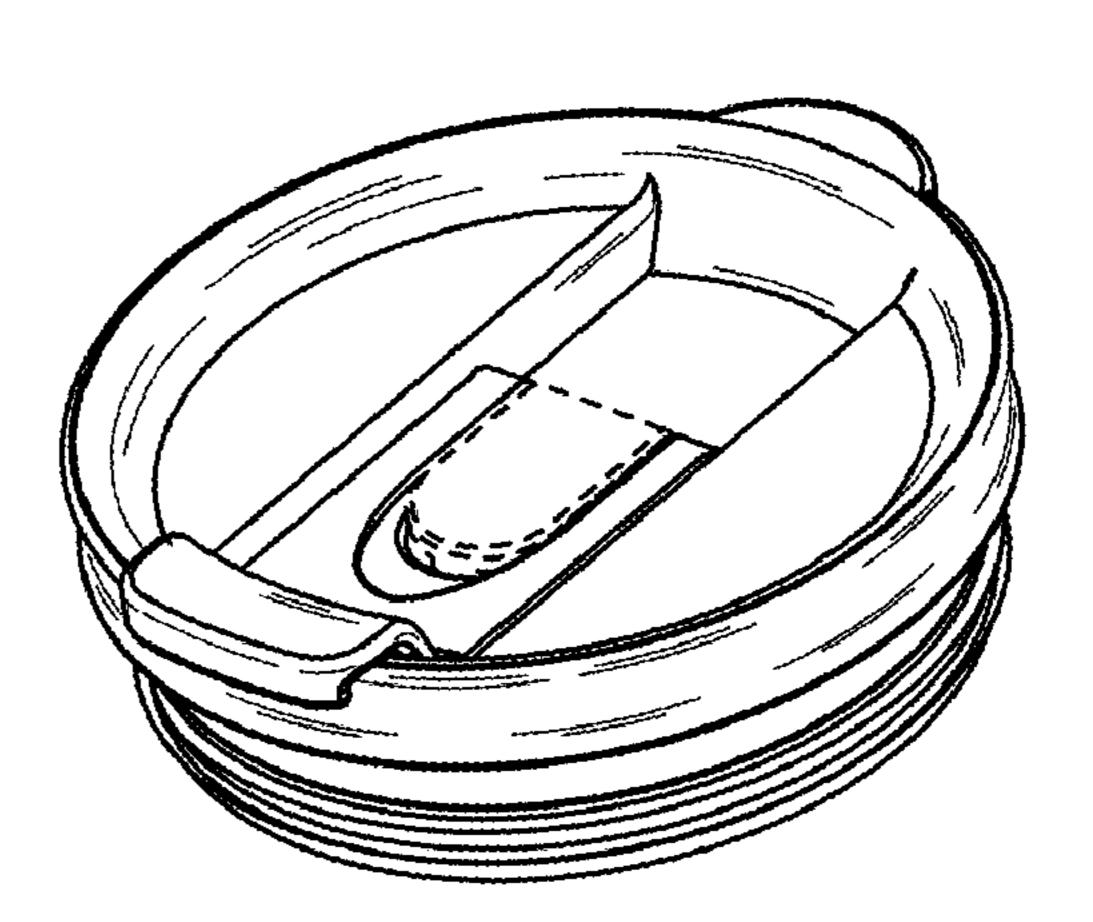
is a top perspective view of a third embodiment of my design comprising a tumbler lid illustrated with a fully assembled view;
